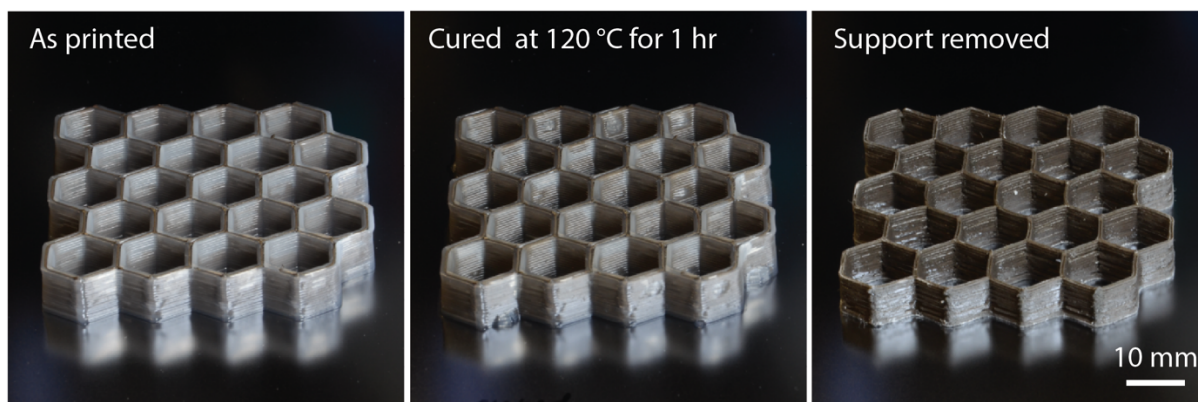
| Removal of support inks by solvent rinse after curing. The printed magnetic inks are cured by heating at 120 °C for 1 hr. The support ink is then removed by solvent rinses.
